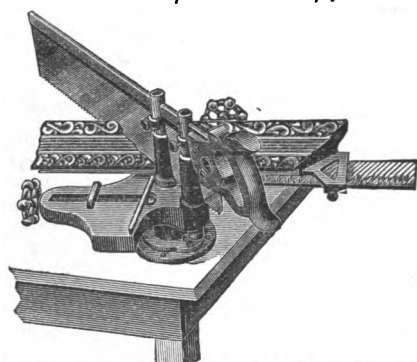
COMBINED MITER SAWING MACHINE AND VISE.
